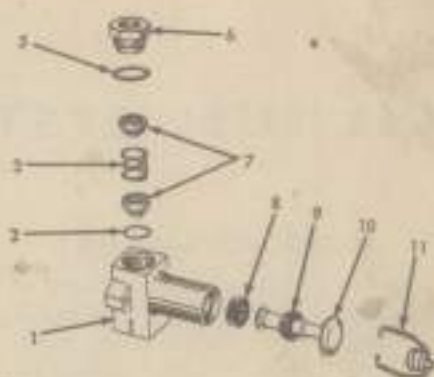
Exploded view of the Reaso-Master fuel primer pump used on D-15 diesel tractors. Location of primer pump may be different than PP-Fig. 62.
